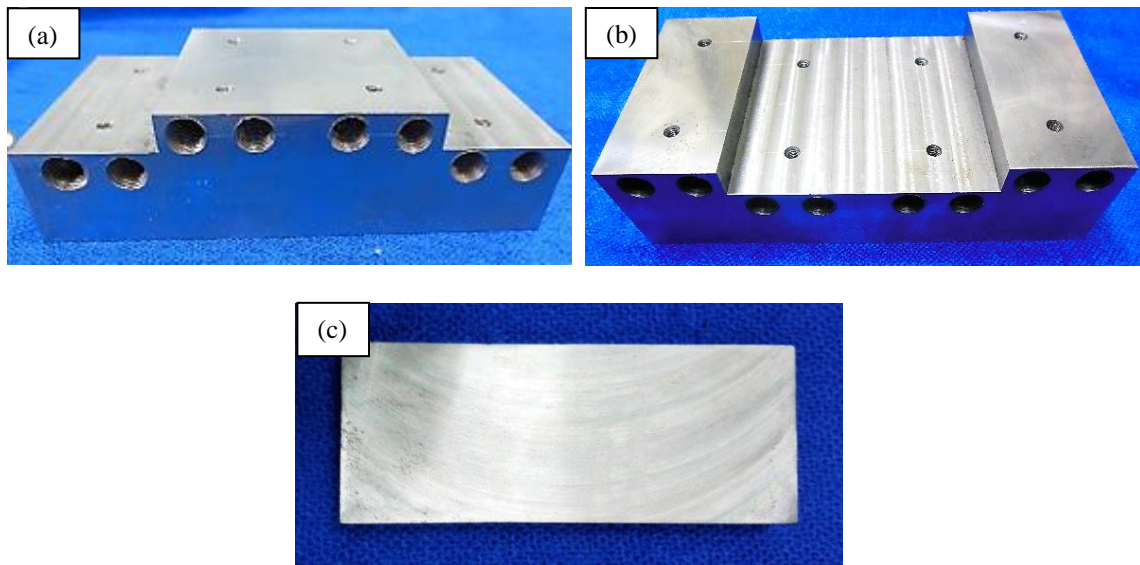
As-machined geometry of (a) upper and (b) lower die insert holder, and (c) die insert surface condition before laser melting.
